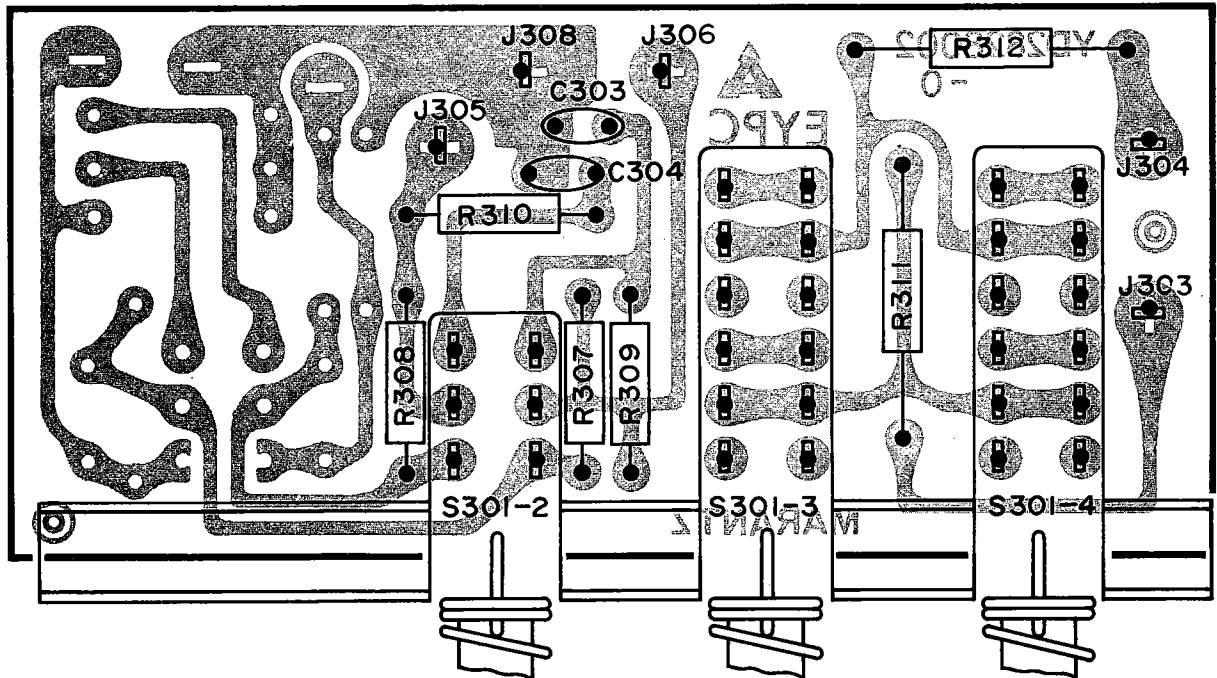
Main, Remoto, High and Low Filter Switch Unit Assembly P300 Component Locations
